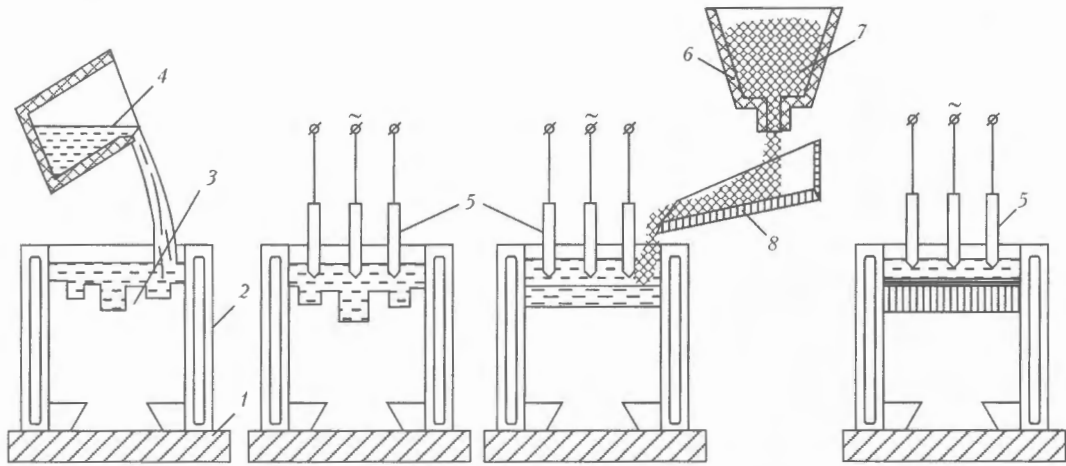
ESC of dies using tool steel chips: 1 – hearth; 2 – fixed mould; 3 – worn out die; 4 – ladle with liquid slag; 5 – non-consumable electrodes; 6 – proportioner; 7 – chips; 8 – spout
